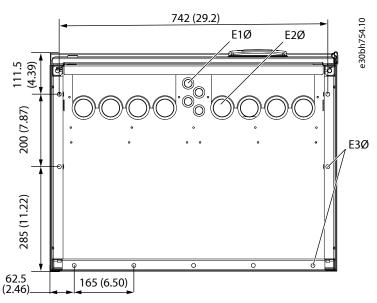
Dimensions of the Mounting Holes for VACON® NXS/NXP AC Drive, FR11 Standalone
